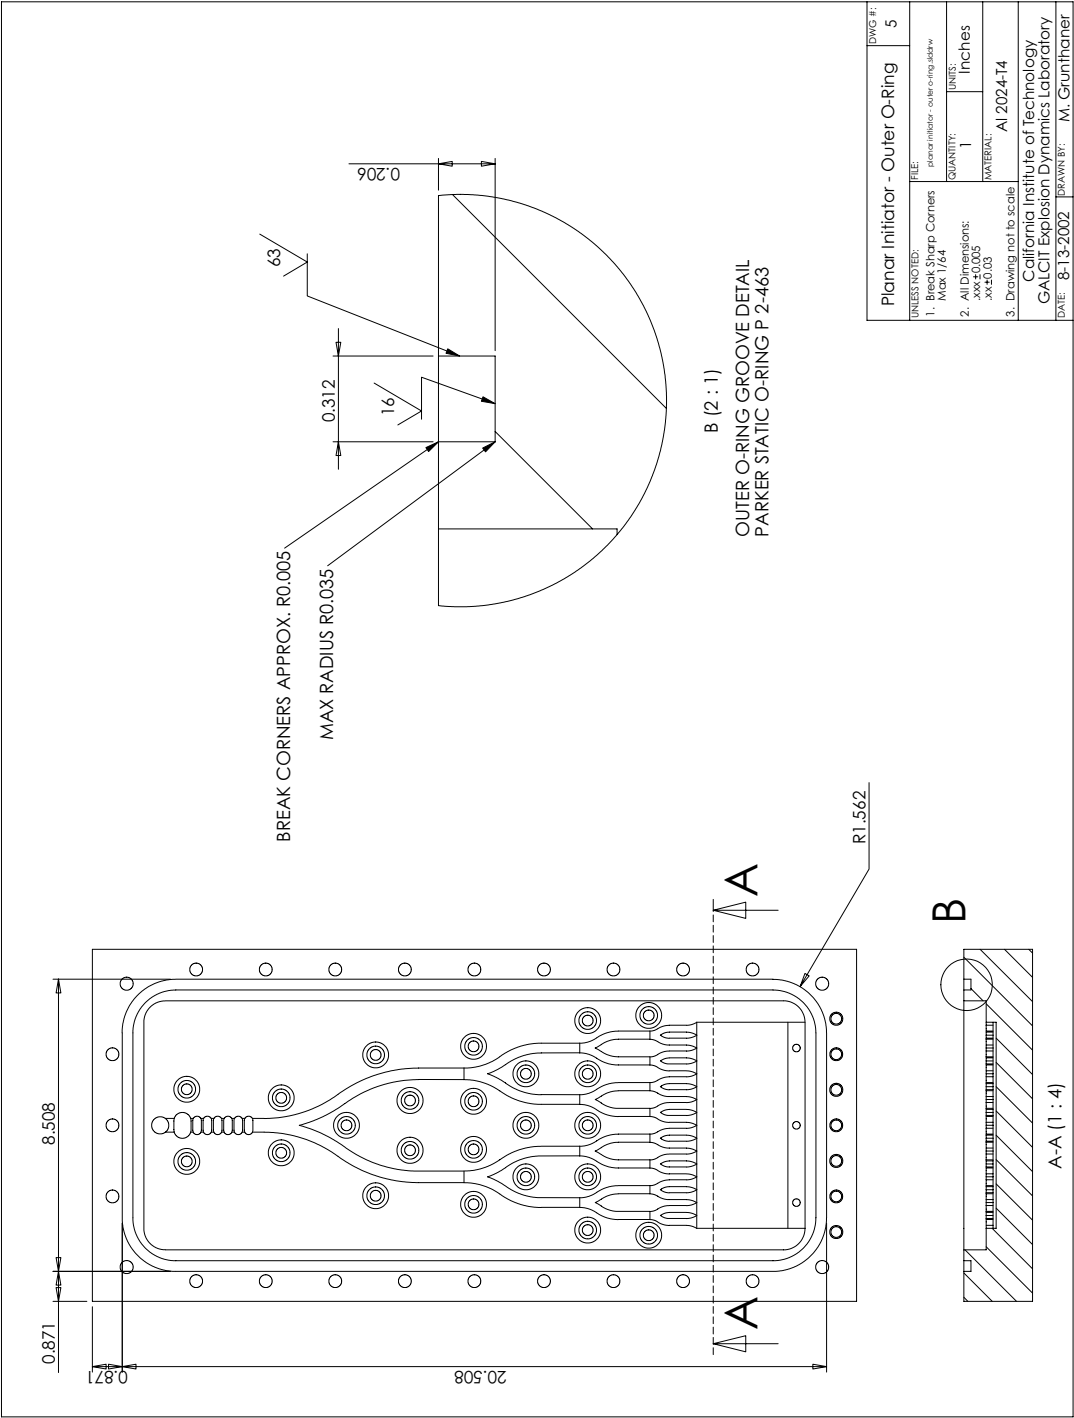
Planar Initiator - Outer O-Ring, Dwg No. 5
